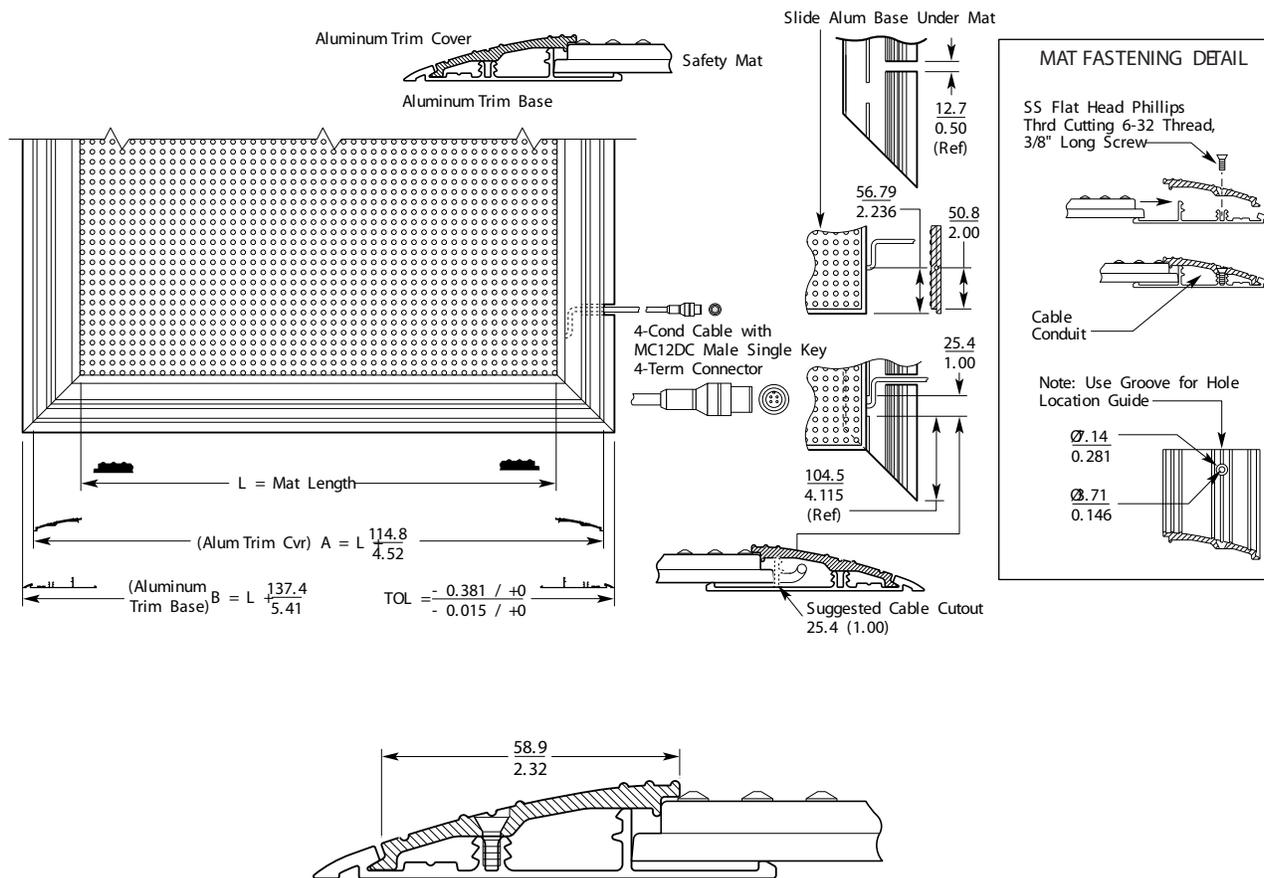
Dimensions and Installation of 2-Part Aluminum Base, Aluminum Cover with Mitered Corners
